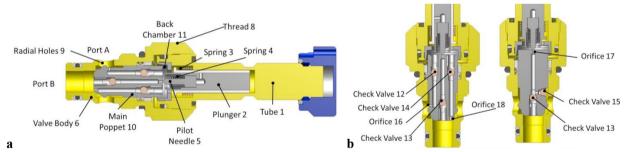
CAD cross view of the cartridge valve (a); details of the main poppet (b)
